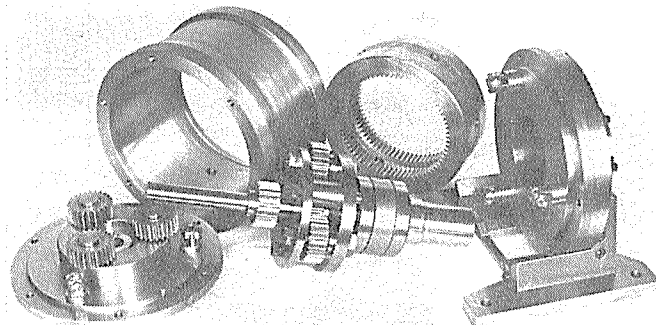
Inside View of Combined Planetary Reduction Gears (with Power Circulation)
